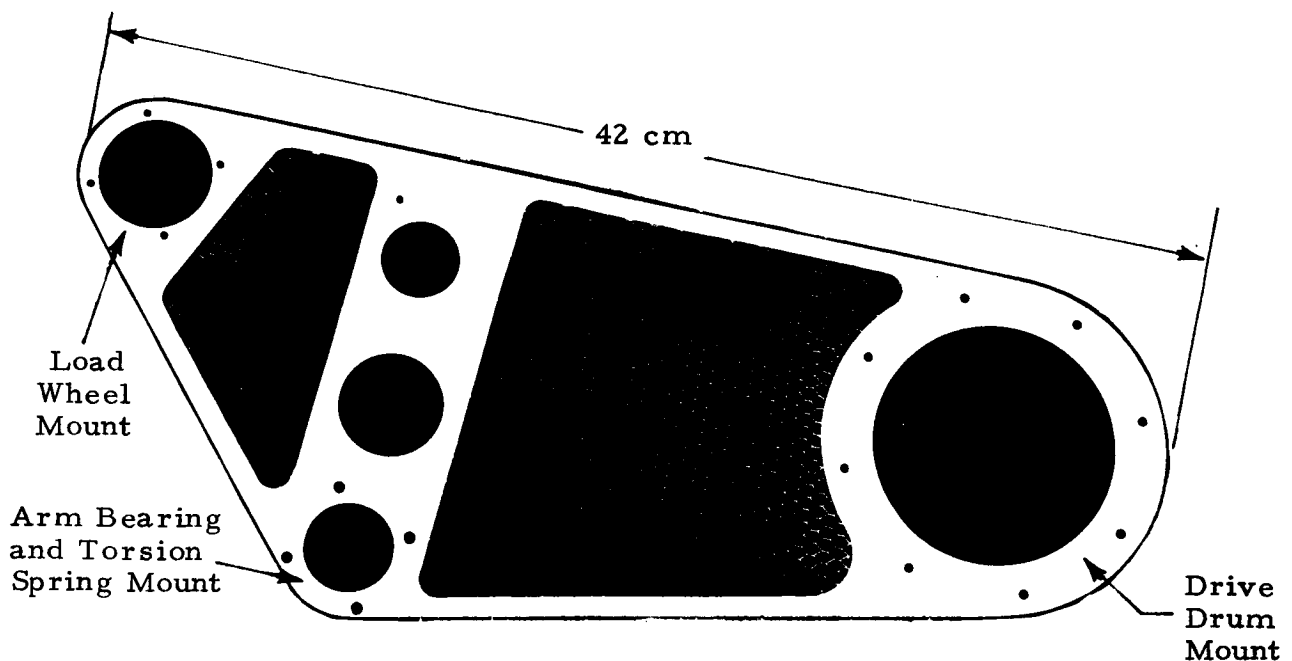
Core of Closed-Section Suspension Arm for Improved Torsional and Bending Stiffness. Aluminum honeycomb (3/16 in. cells) and magnesium alloy frame (1/4 in. thick).
